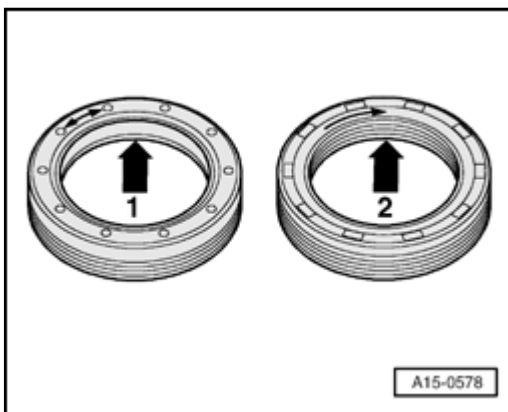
Identifying PTFE Seals - Teflon & Coil Spring Type
